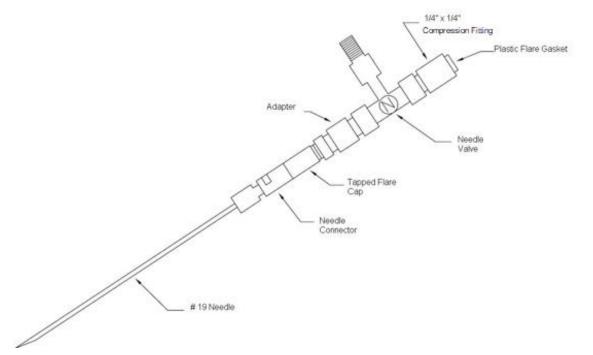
Example Needle Attachment Assembly for Cylinder Sampling (Informative)
